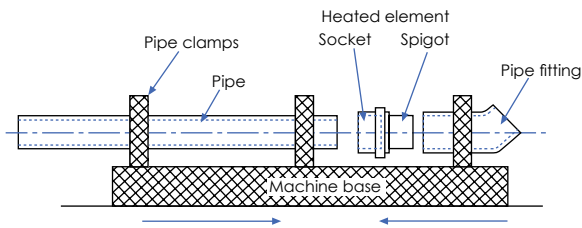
PRINCIPLE OF HEATED-TOOL SOCKET WELDING AS PER SANS/ISO 10268-1 - EDITION 1.3
